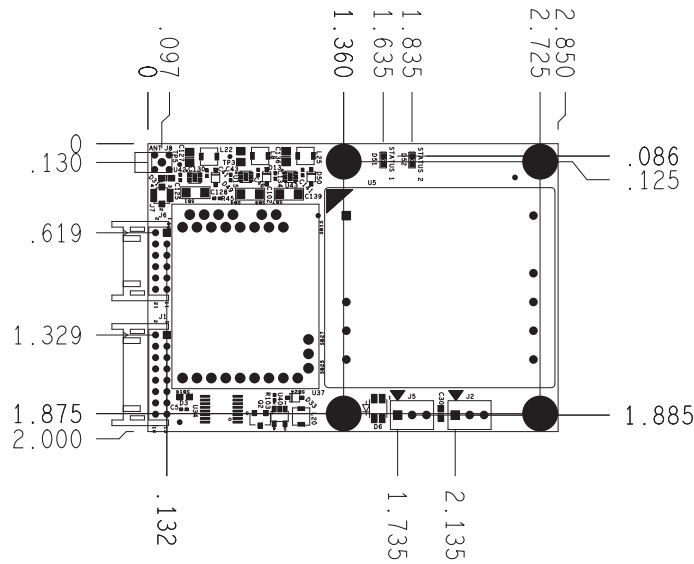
SAASM FireFly-IIA Board Mechanical Drawing
